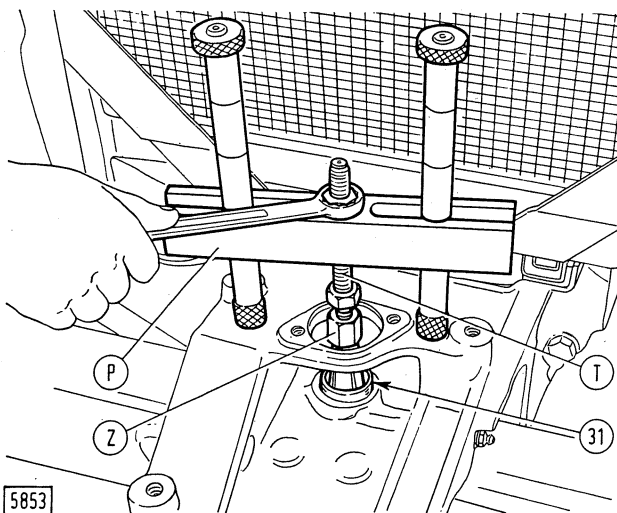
Removing the bushing (31) from the front axle bracket.
